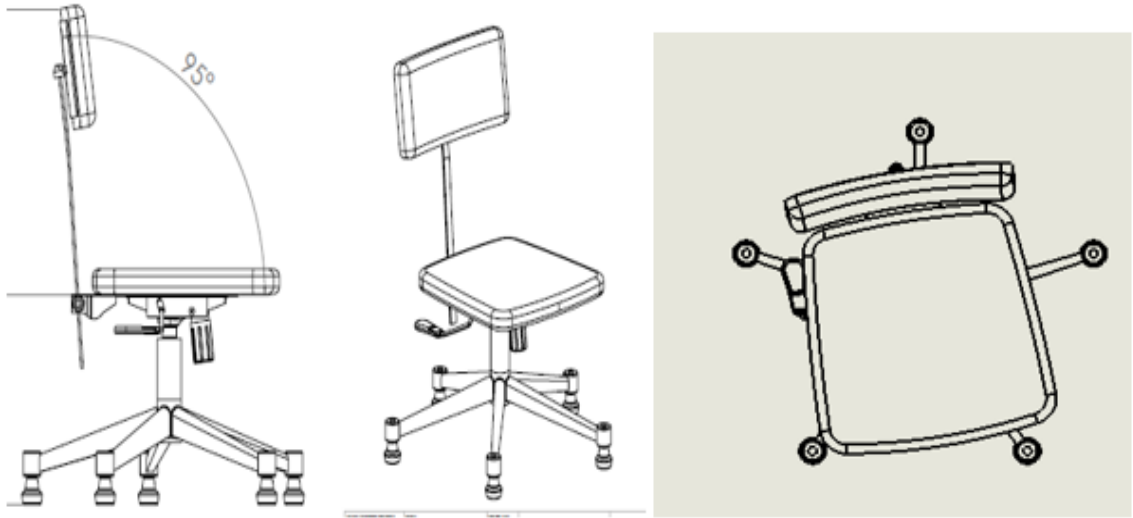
A proposed Pneumatic Cylinder adjustable sewing chair from different angles
